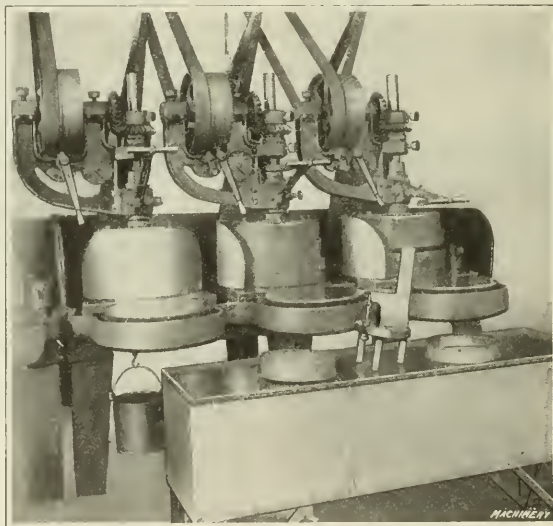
Oil-grinding Machine on which Final Grinding Operation is performed — Attention is called to Dials showing Approximate Time when Grinding will be finished, and Indicator for testing Size of Balls
